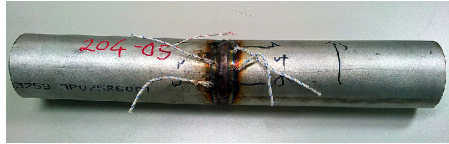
Girth-welded SUS347H mock-up.
